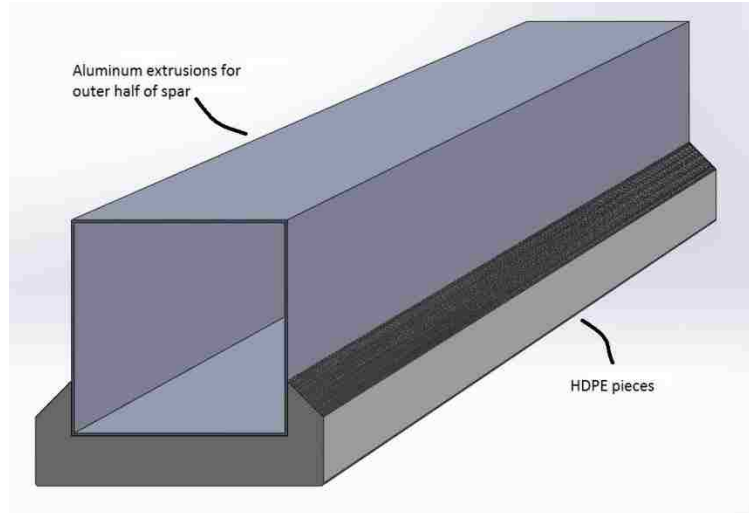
Aluminum extrusion and HDPE piece for outer half of spar
